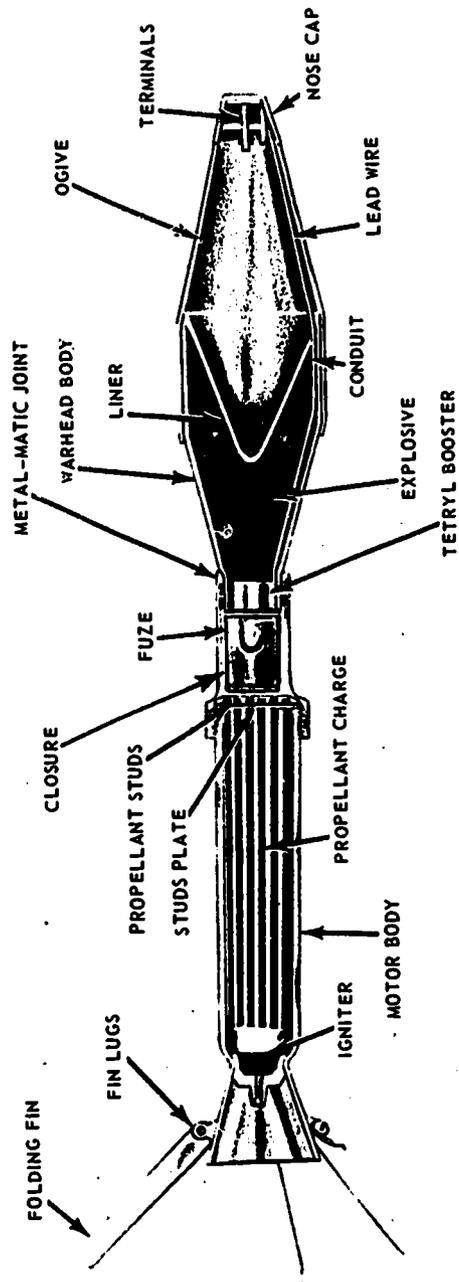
The 66-mm high explosive antitank (HEAT) rocket.
